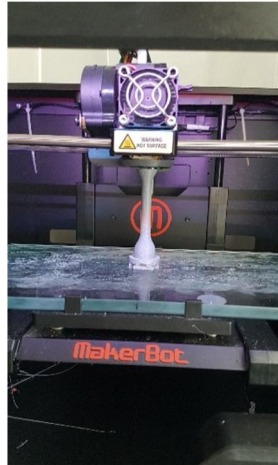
Specimen being printed in the Makerbot Replicator 2 3D printer.
